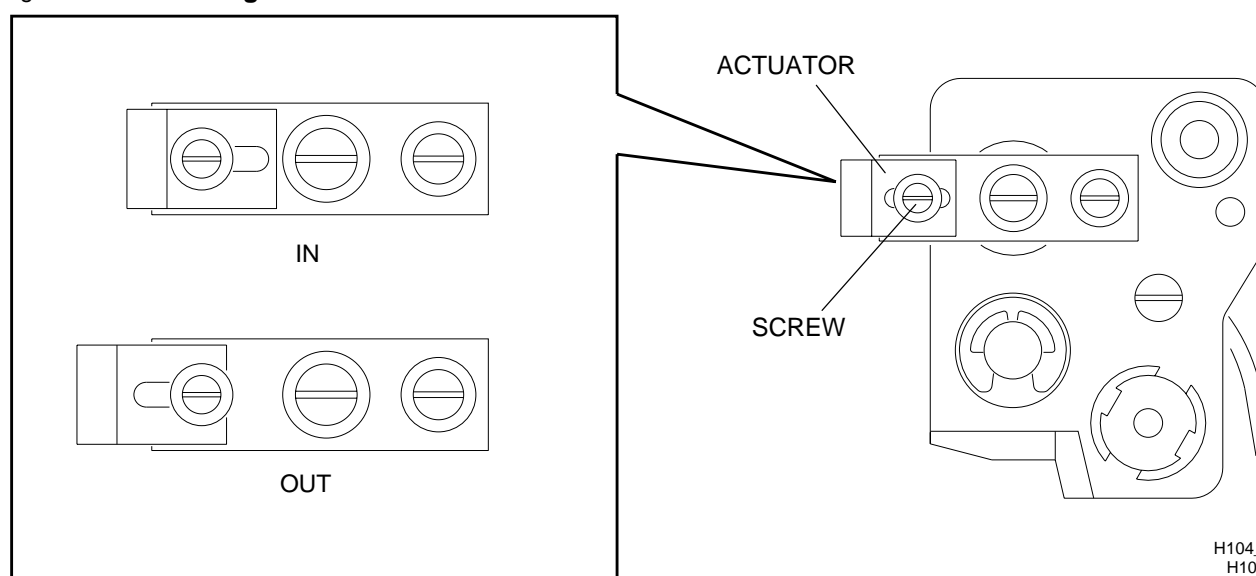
Checking the "IN" and "OUT" Positions of the Drive Side ACTUATOR
